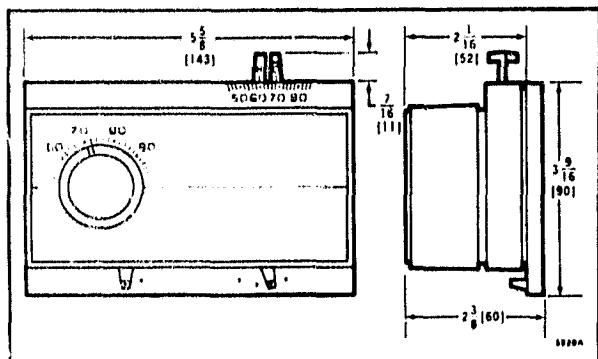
DIMENSIONS OF T872 THERMOSTAT MOUNTED ON Q672 SUBBASE.
